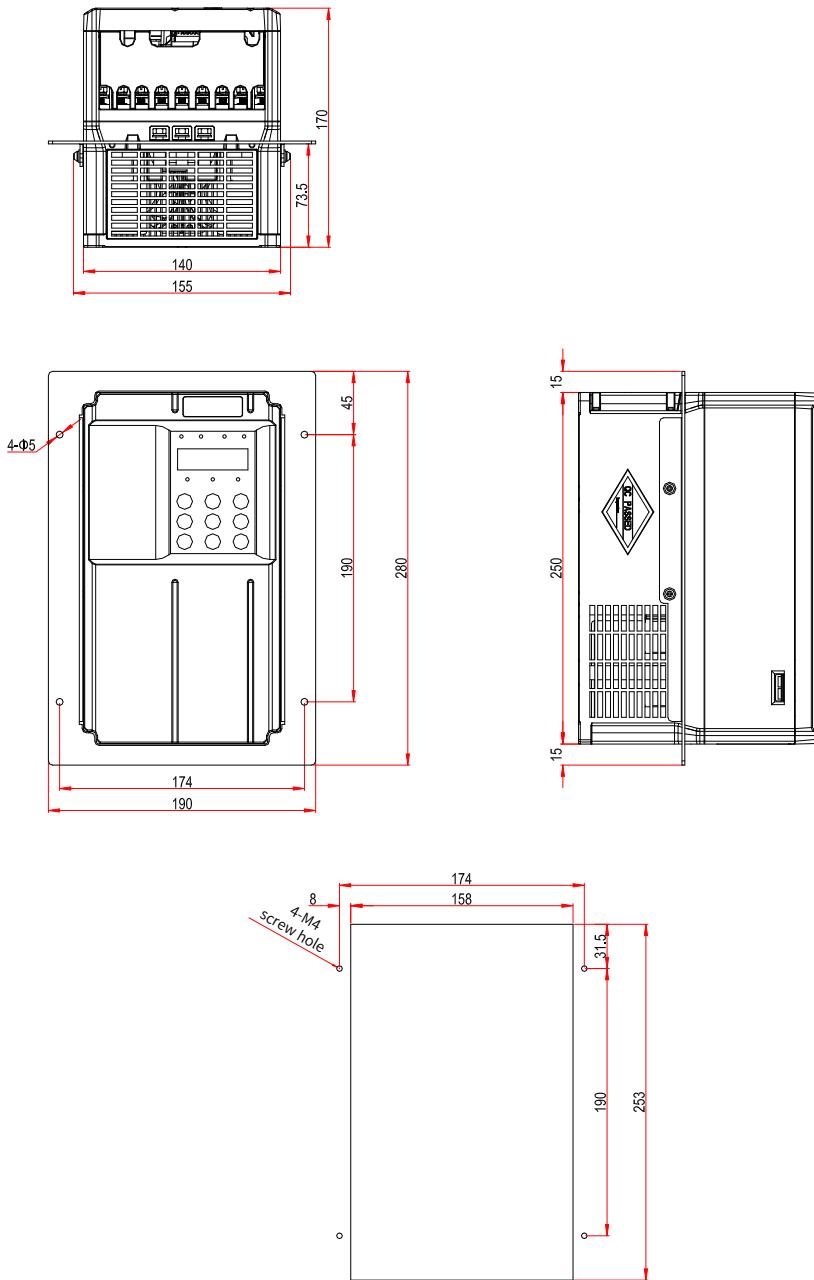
Through-hole mounting bracket and mounting hole dimensions for 7.5-11 kW AC drive models (mm)
